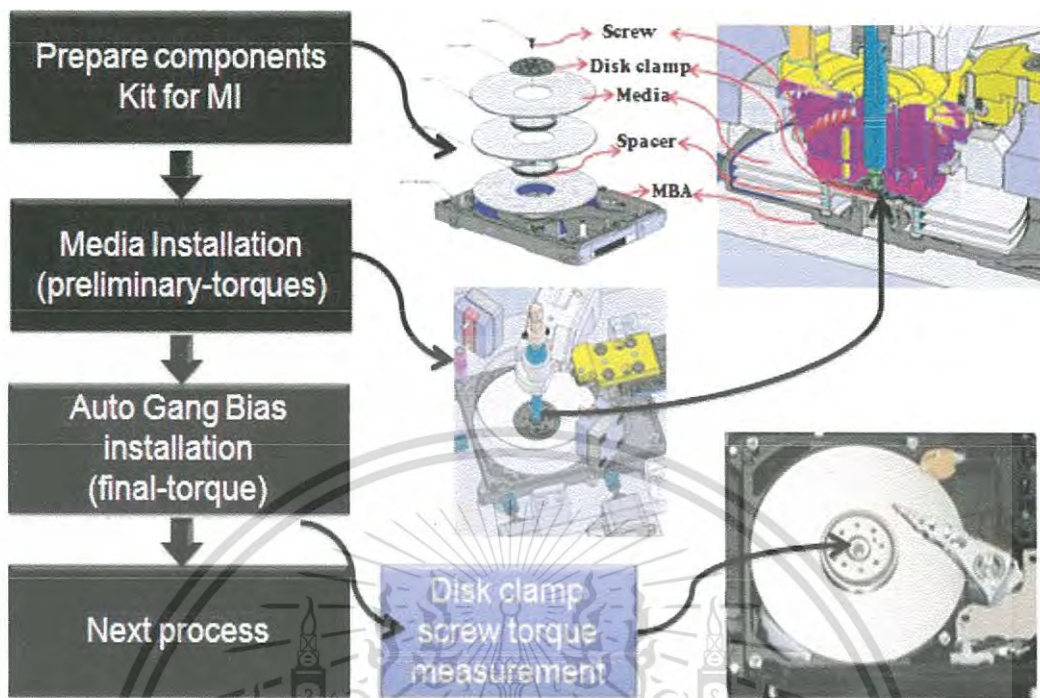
Process step of disk clamp screw fastening at MI and AGB [1]
